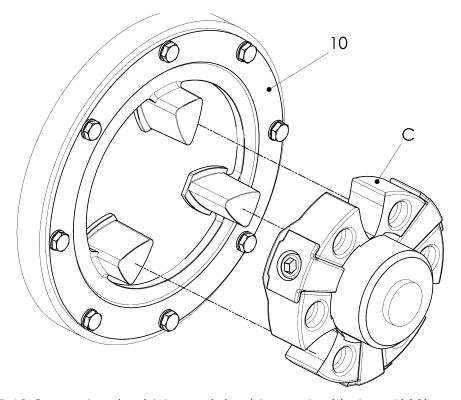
Connecting the driving and the driven units (design -4000)
